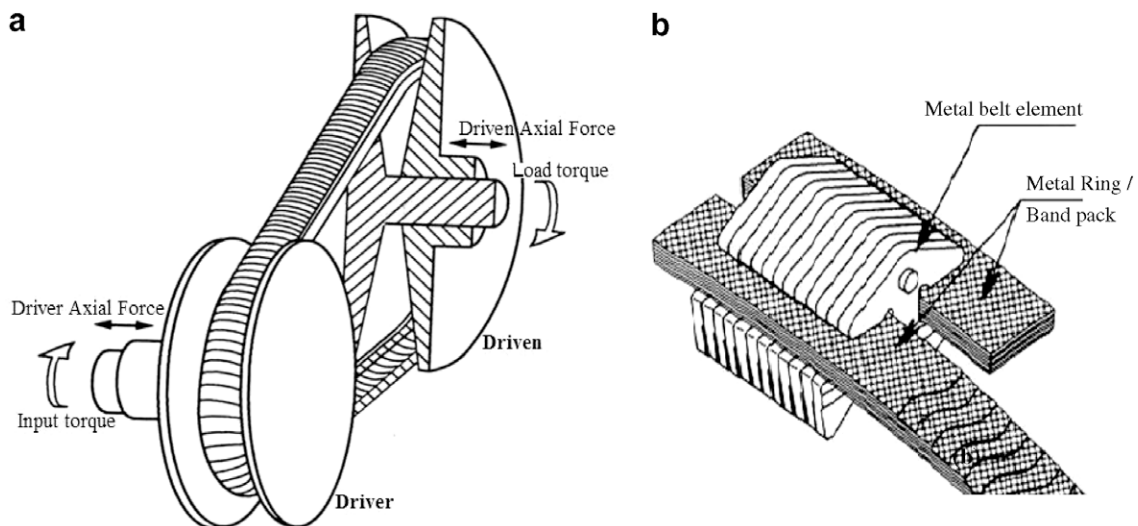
Metal V-belt CVT drive: (a) basic configuration; (b) belt structure [15].
